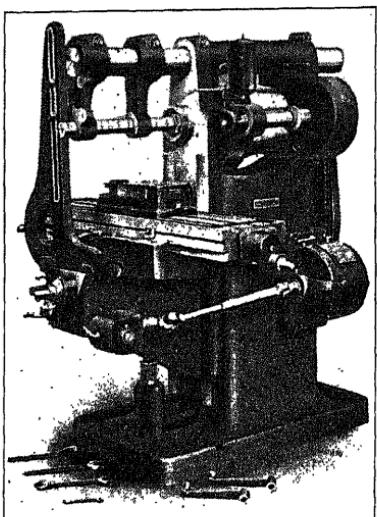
Milling machine, showing universal joint. Kempsmith Manufacturing Co., Milwaukee.
